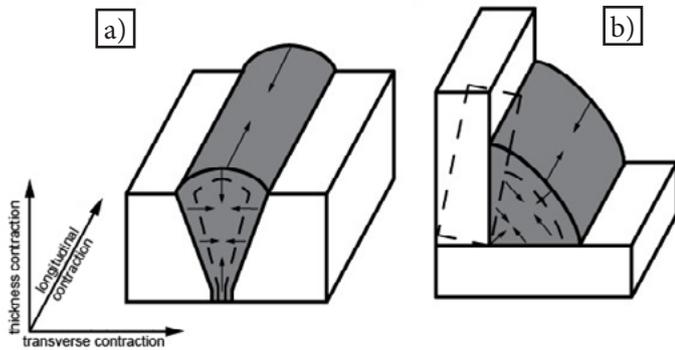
Directions of volume changes in a) butt welds and b) fillet welds during post-weld cooling
